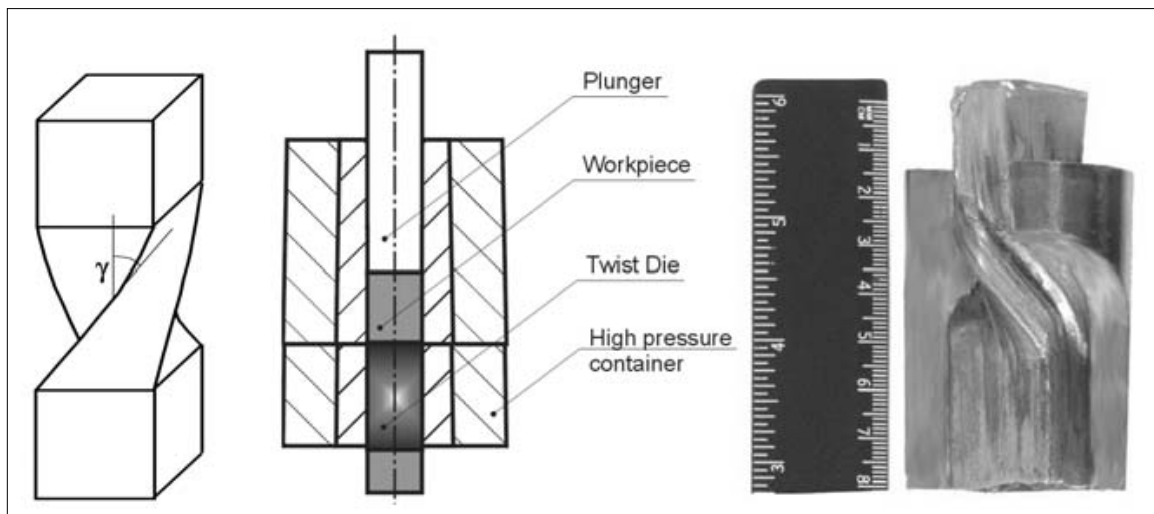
Illustration of the twist extrusion process (b) specimen installation scheme for twist extrusion (C) processed copper workpiece [3].
